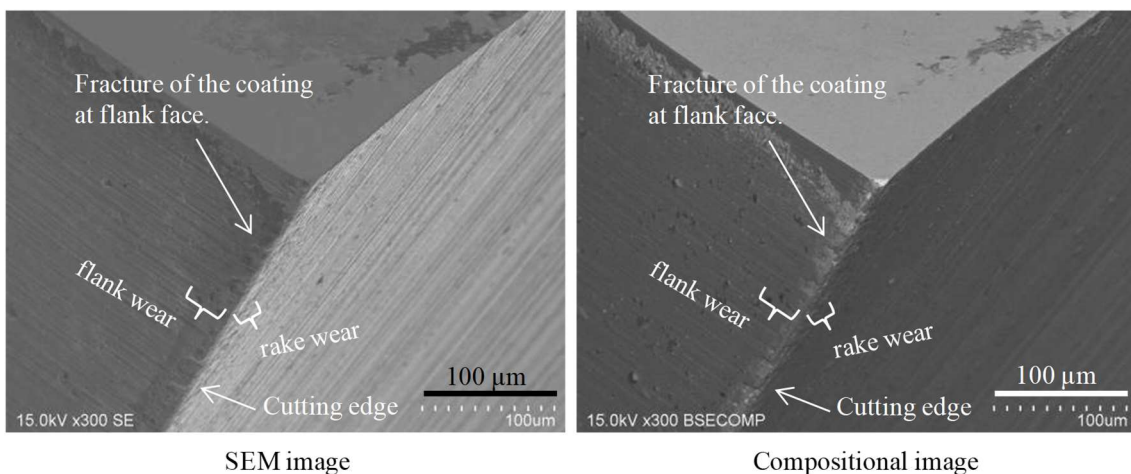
SEM and compositional images of the coated cutting edge after machining of Ti-6Al-4V alloy. TiN coated end-mill tools, cutting speed $V = 60$ m/min, feed rate $f = 0.04$ mm/tooth, $a_p = 6$ mm, $a_e = 0.3$ mm, cutting length $L = 1$ m, coating thickness: 2 μm .
